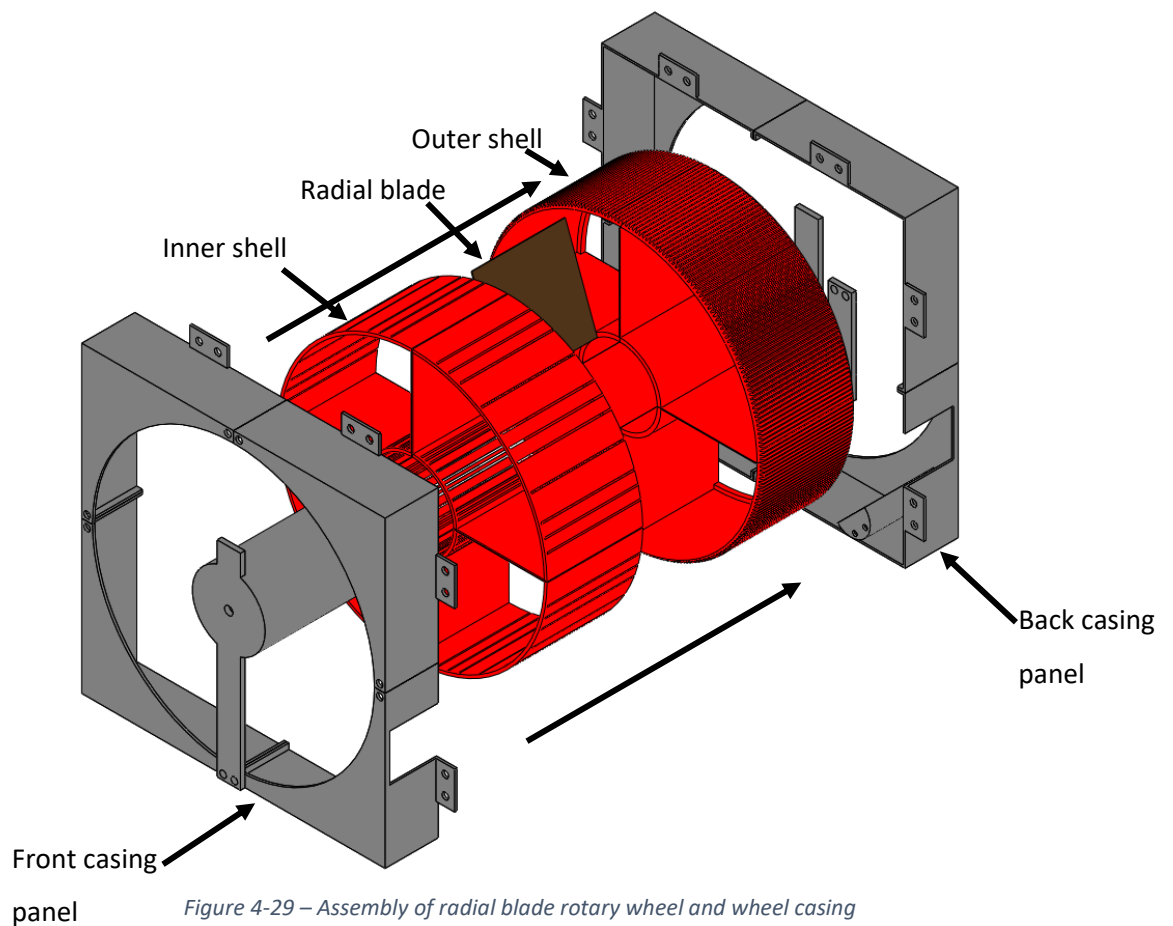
Assembly of radial blade rotary wheel and wheel casing
